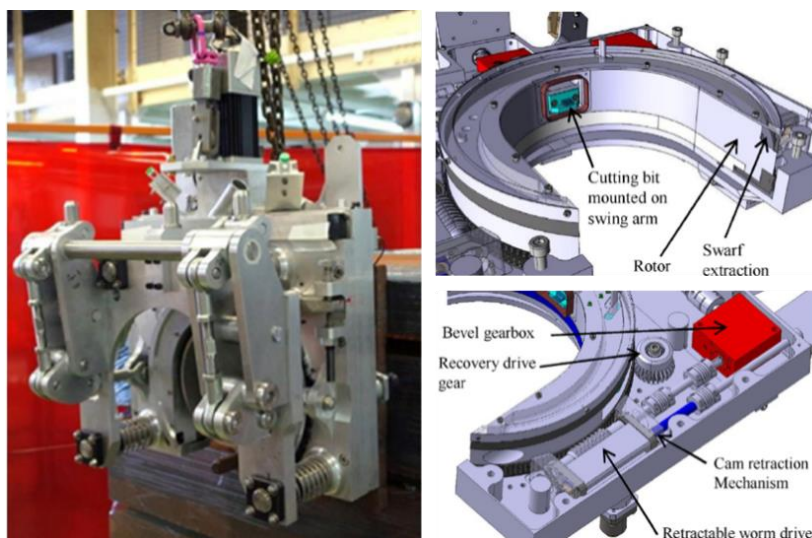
A lathe-based cutting tool and its drive system for ITER pipes [96]
